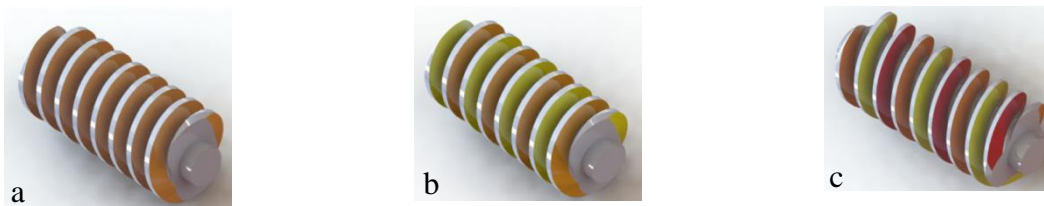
7: Worm gear threads, (a) single start thread; (b) double start thread; (c) triple start thread
